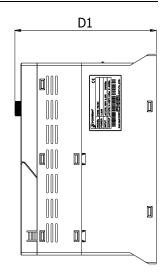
15kW-up G3 series product outside drawing, installation dimension
